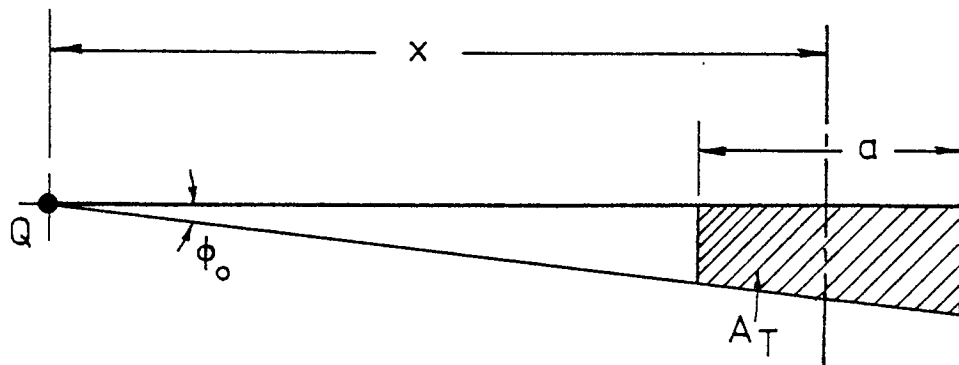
CHIP PRODUCED BY TOP CUTTING EDGE
